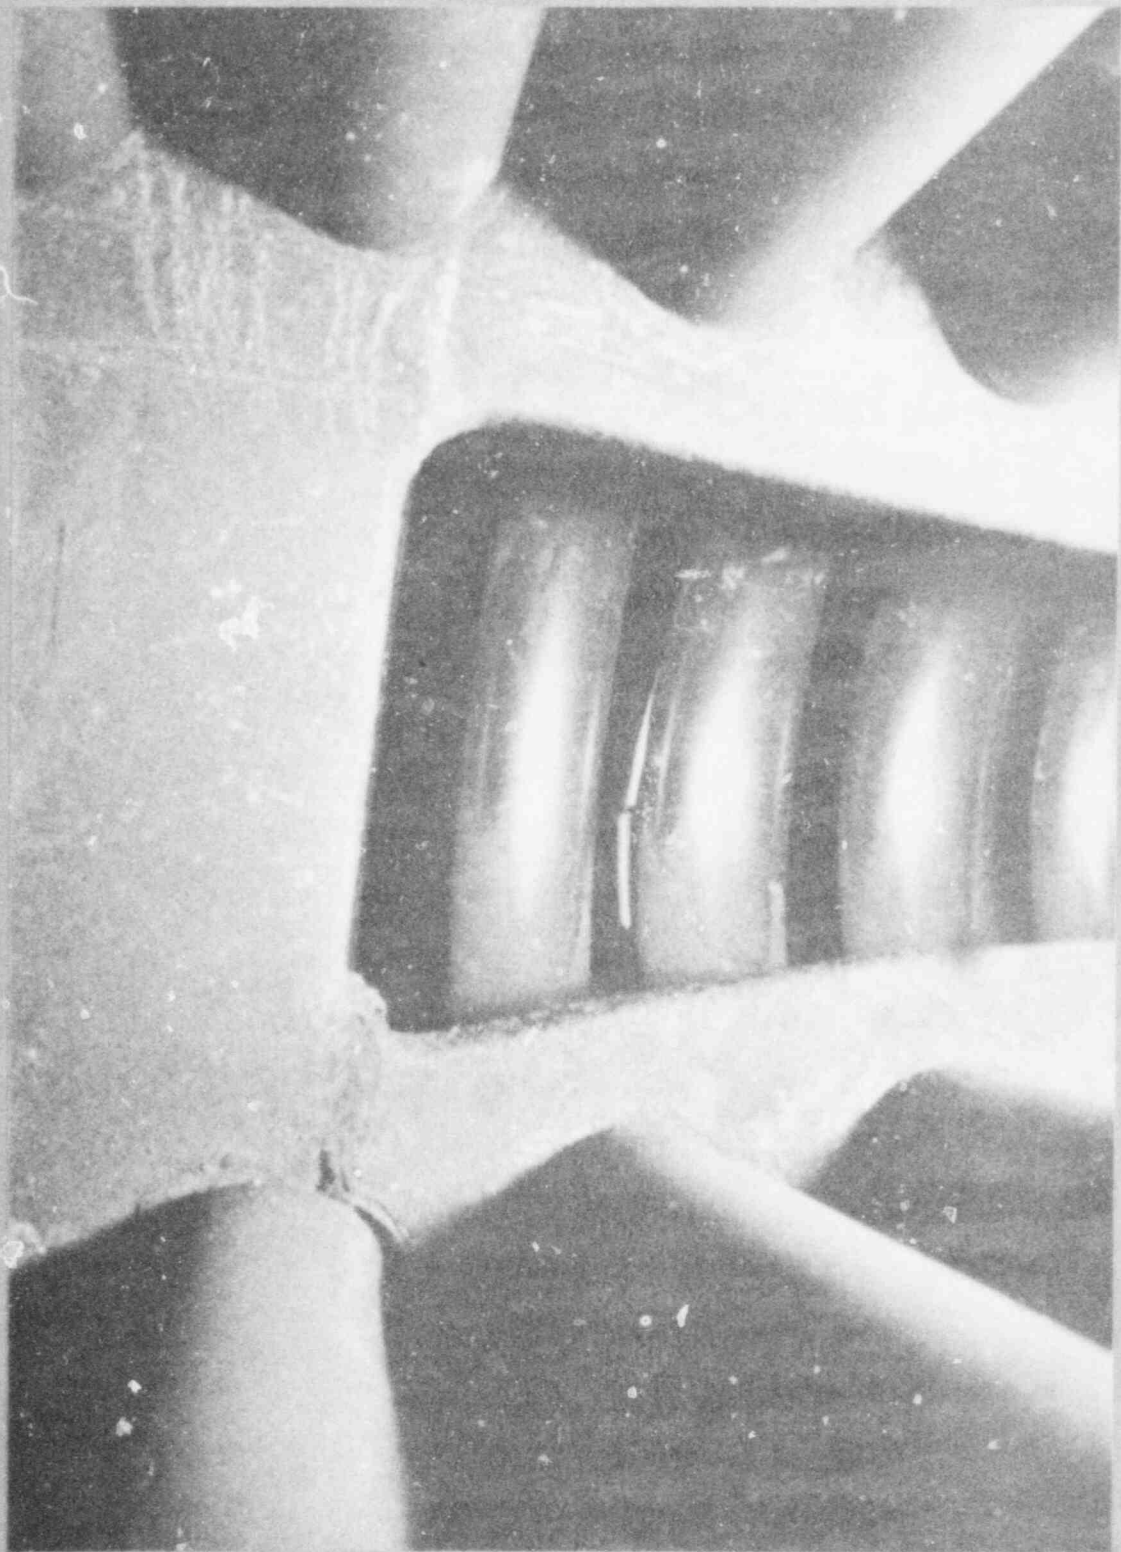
Axial Flap-Type Cracks in Tube Column 91
